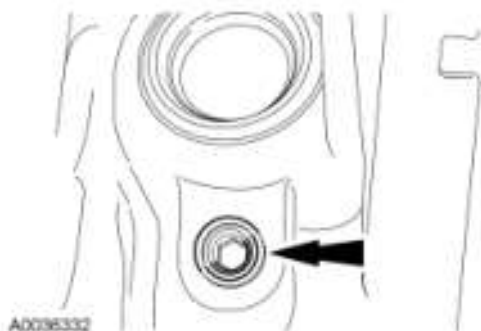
Locating Bolts And RH Engine Support Insulator
